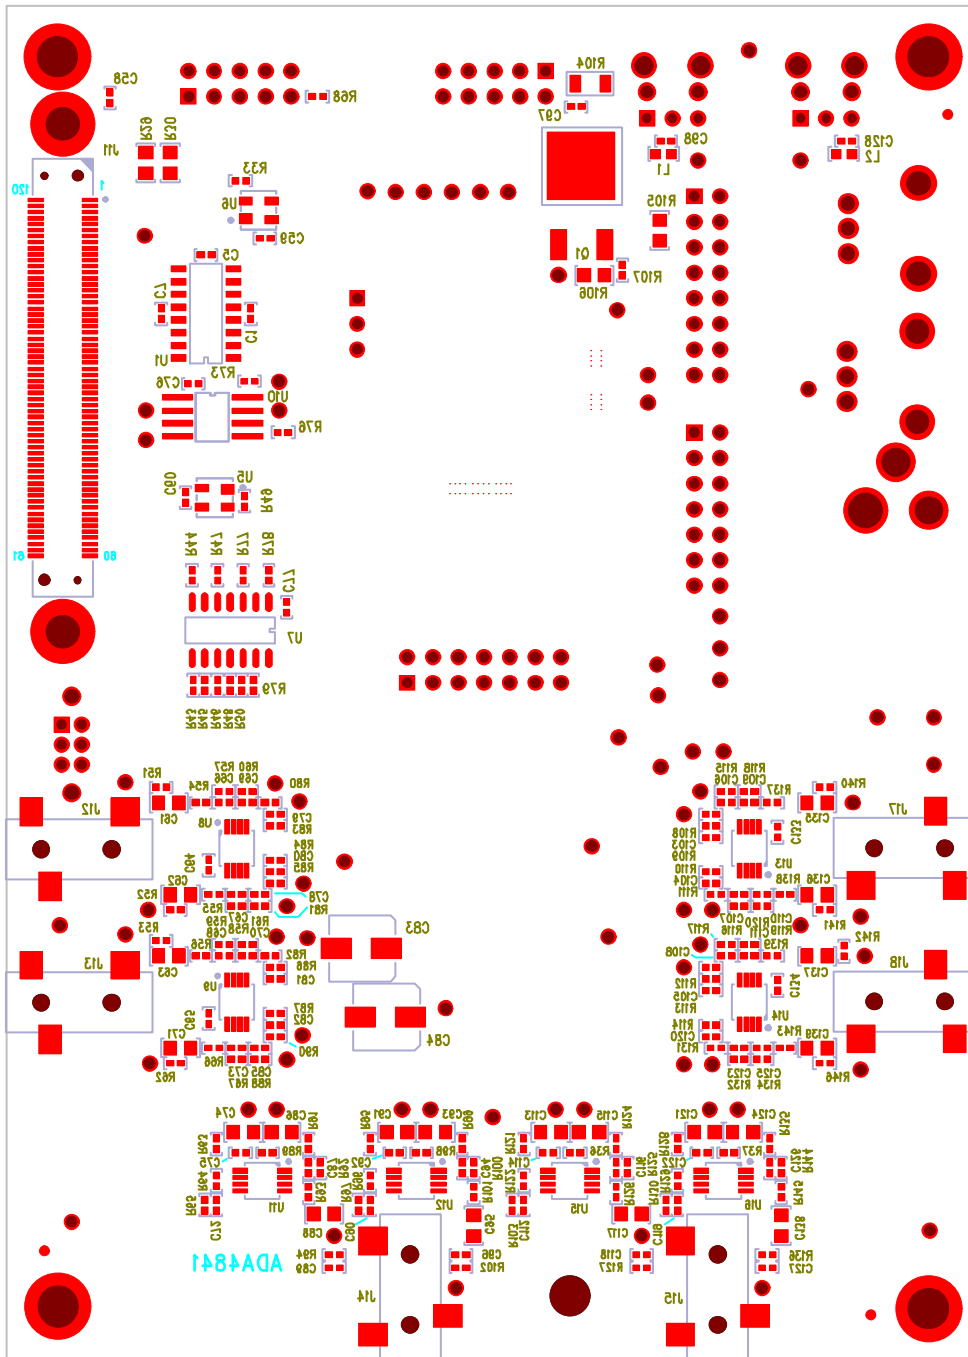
EVAL-ADAU1467Z Layout, Bottom Assembly (Viewed from Above)
